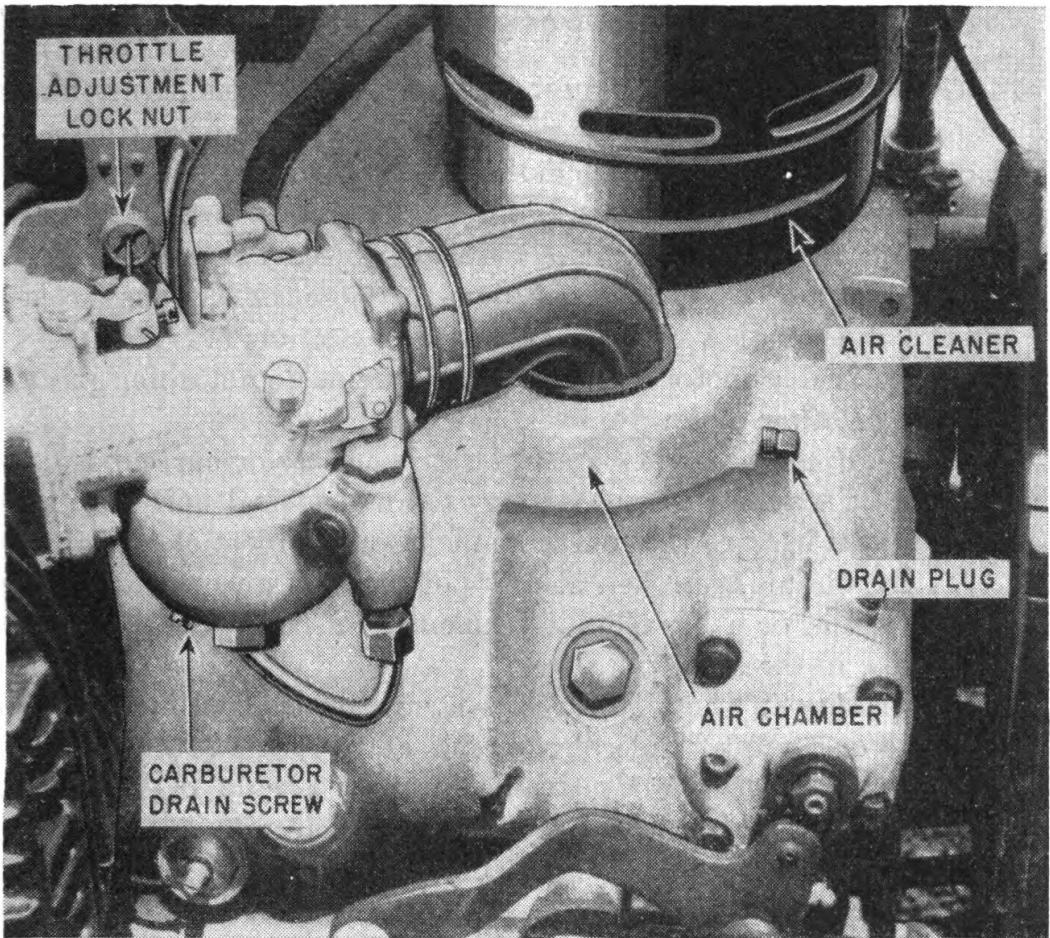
Air cleaner mounting on Harley-Davidson shaft-driven motorcycle.
